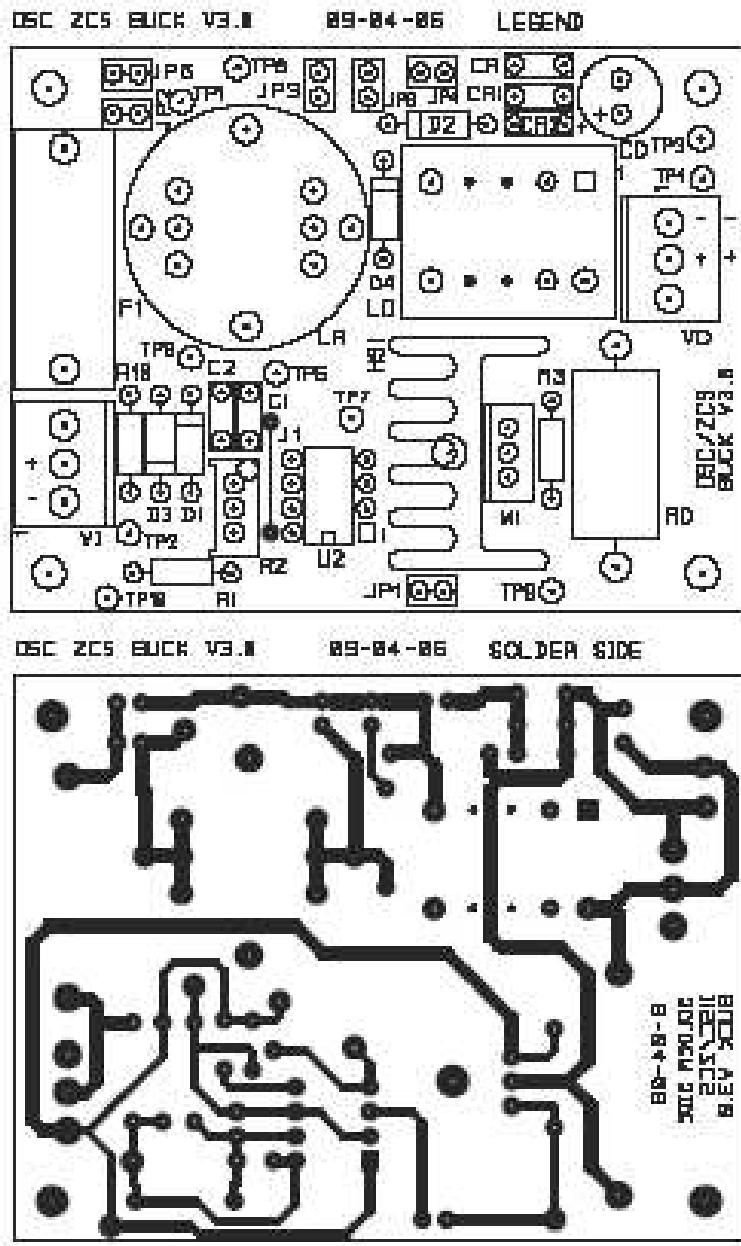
Solder and Component Side of ZCS-Buck Converter
